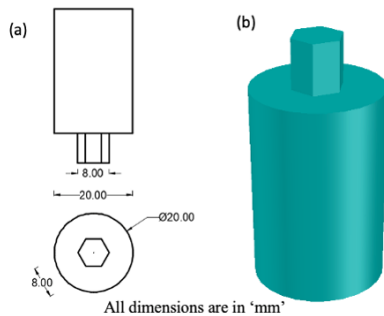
Design of FSW tool a) tool geometry b) model of the hexagonal pin profile
